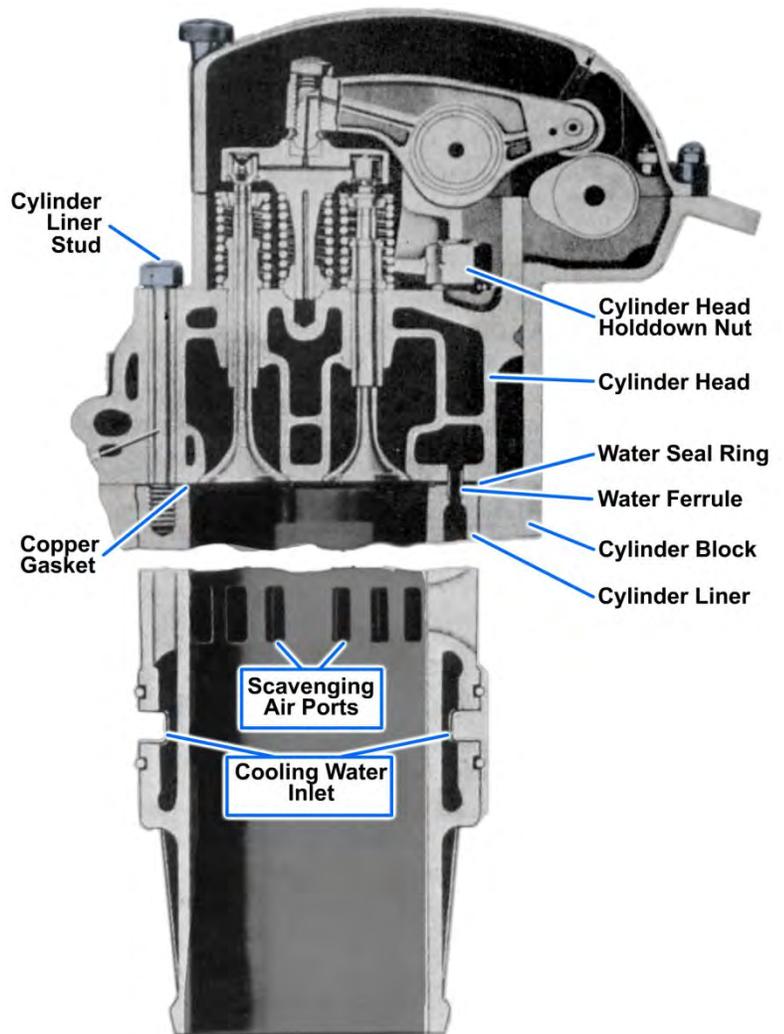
Principal stationary parts of a cylinder assembly.
